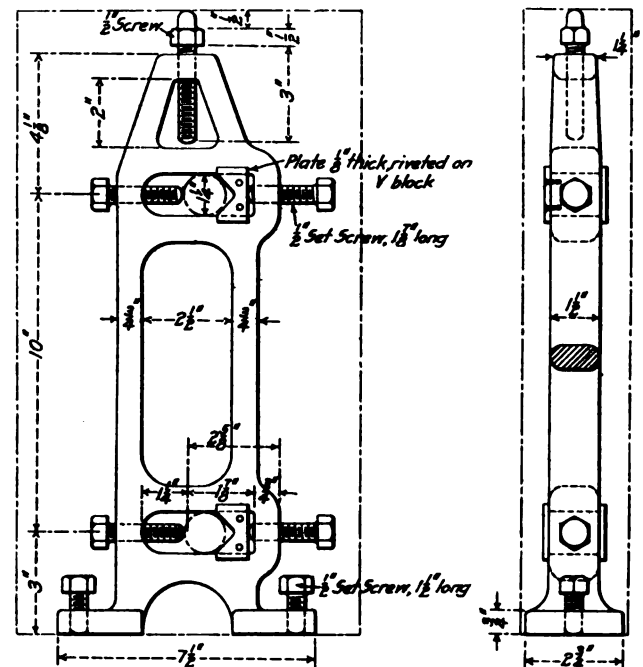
Spindle Holder to be Clamped in Each Pedestal.
